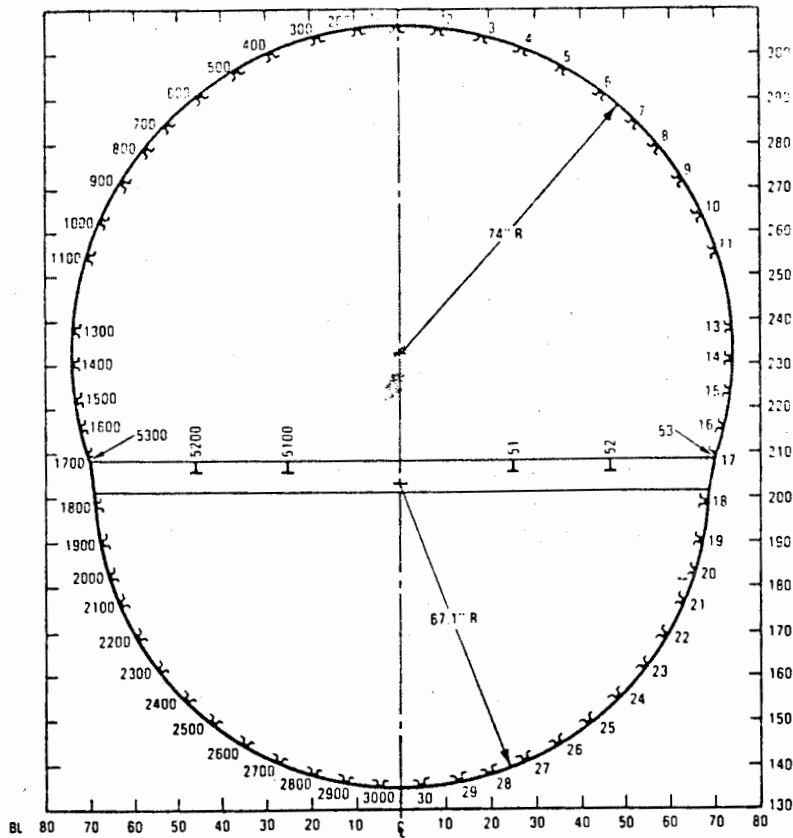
TYPICAL CROSS SECTION WITH STIFFENER LOCATIONS - REAR VIEW
